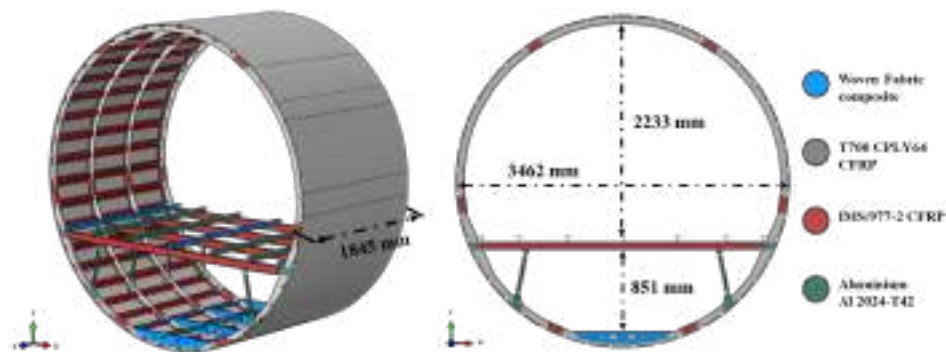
Fuselage barrel FE model and dimensions: a) isometric view; b) frontal view
